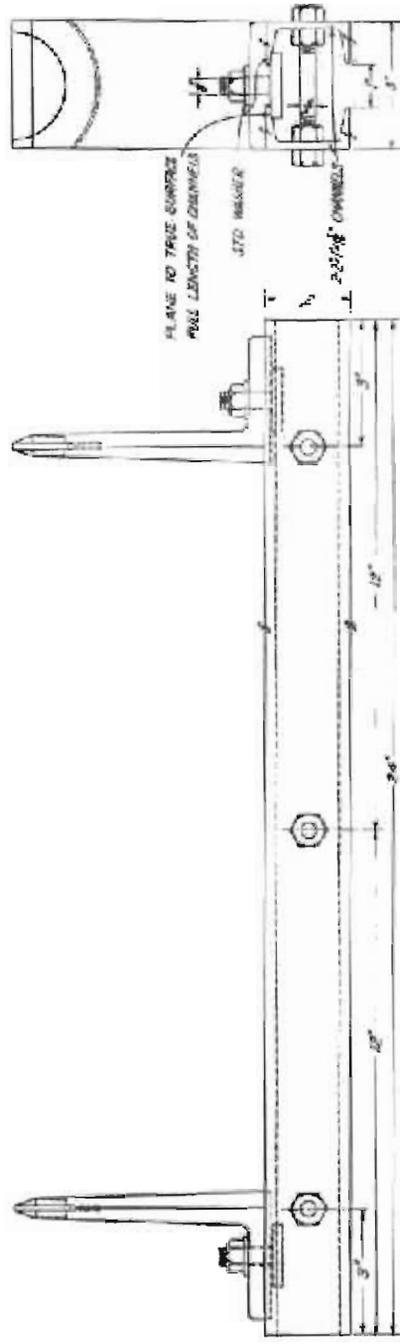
Test set-up for tension flatwise test for sandwich constructions showing specimen and fitting for applying load.
